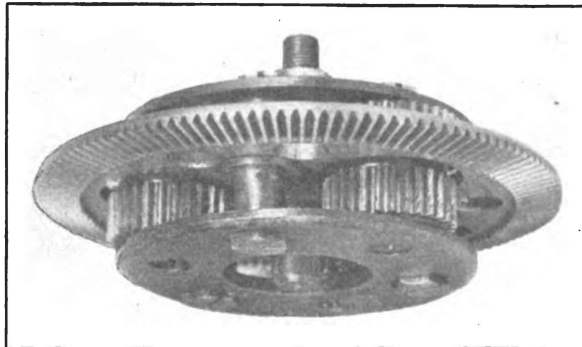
Bijur (rear end) starter bevel and idler gear assembly.
